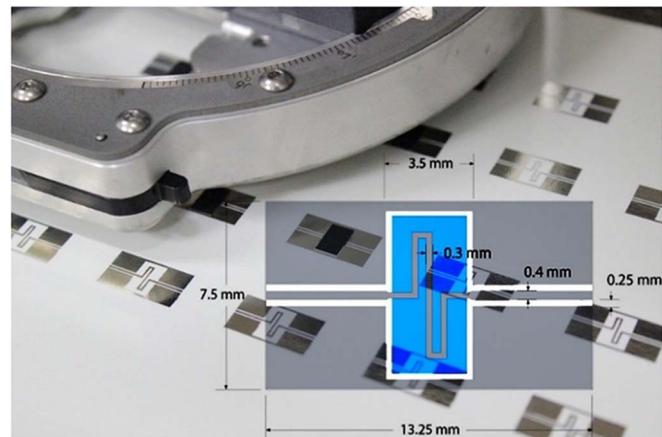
Layout of fabricated inductor, and actual fabricated inductor with and without printed ferromagnetic material.
